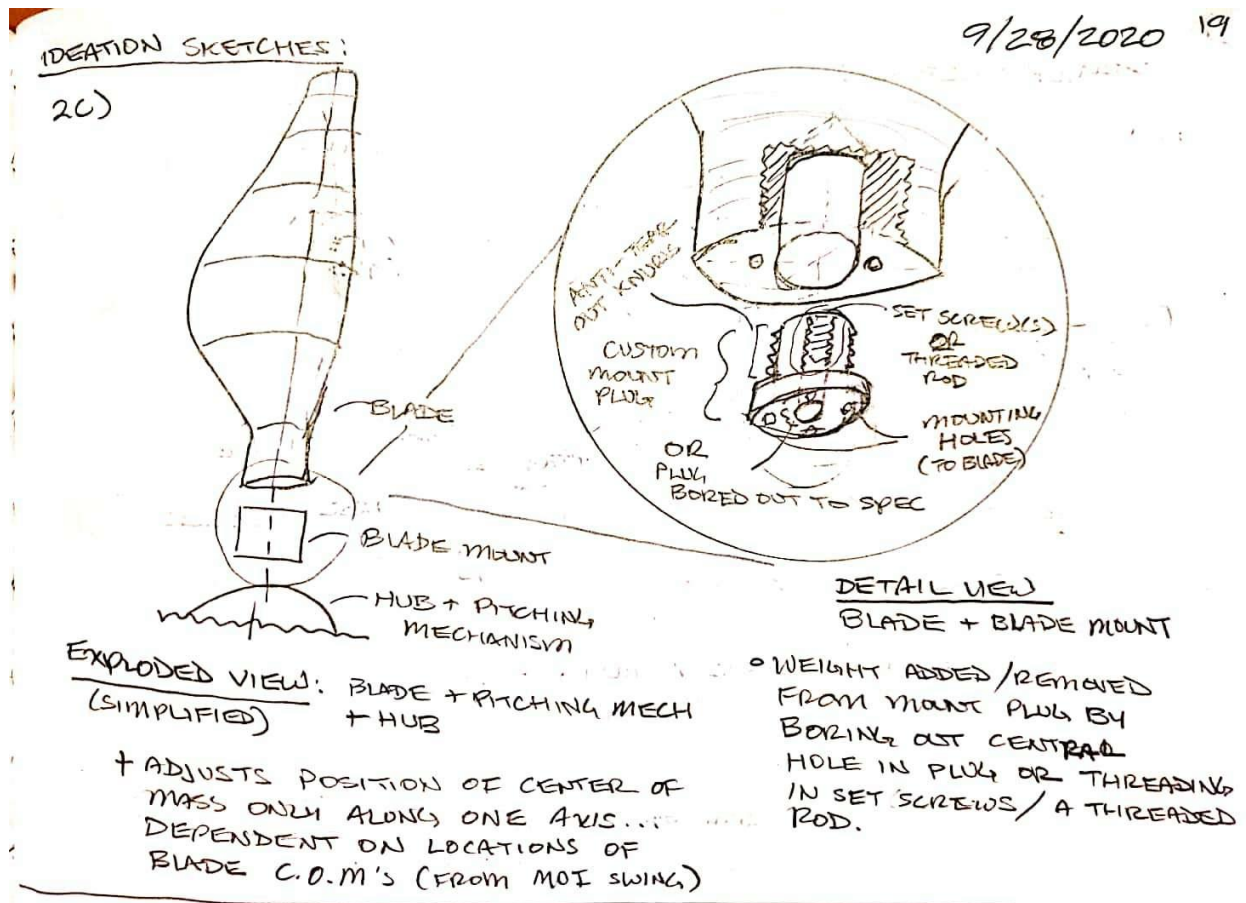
Threaded plate balancing mechanism concept sketch.
